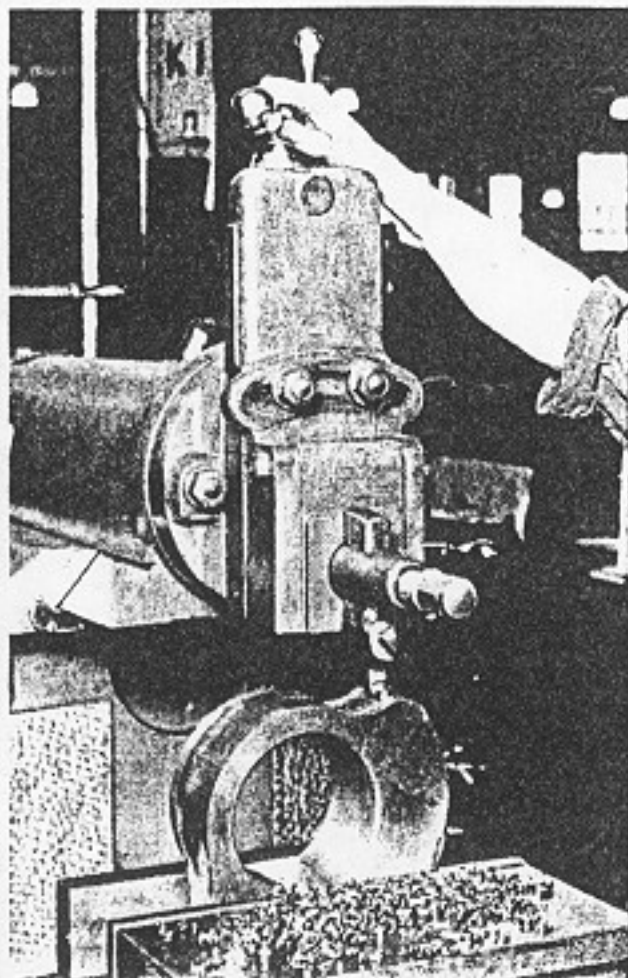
Internal keyways are cut with the extension tool holder while the tool slide is being fed manually. Keyways can be cut at the end of shafts or in any location along a shaft.
